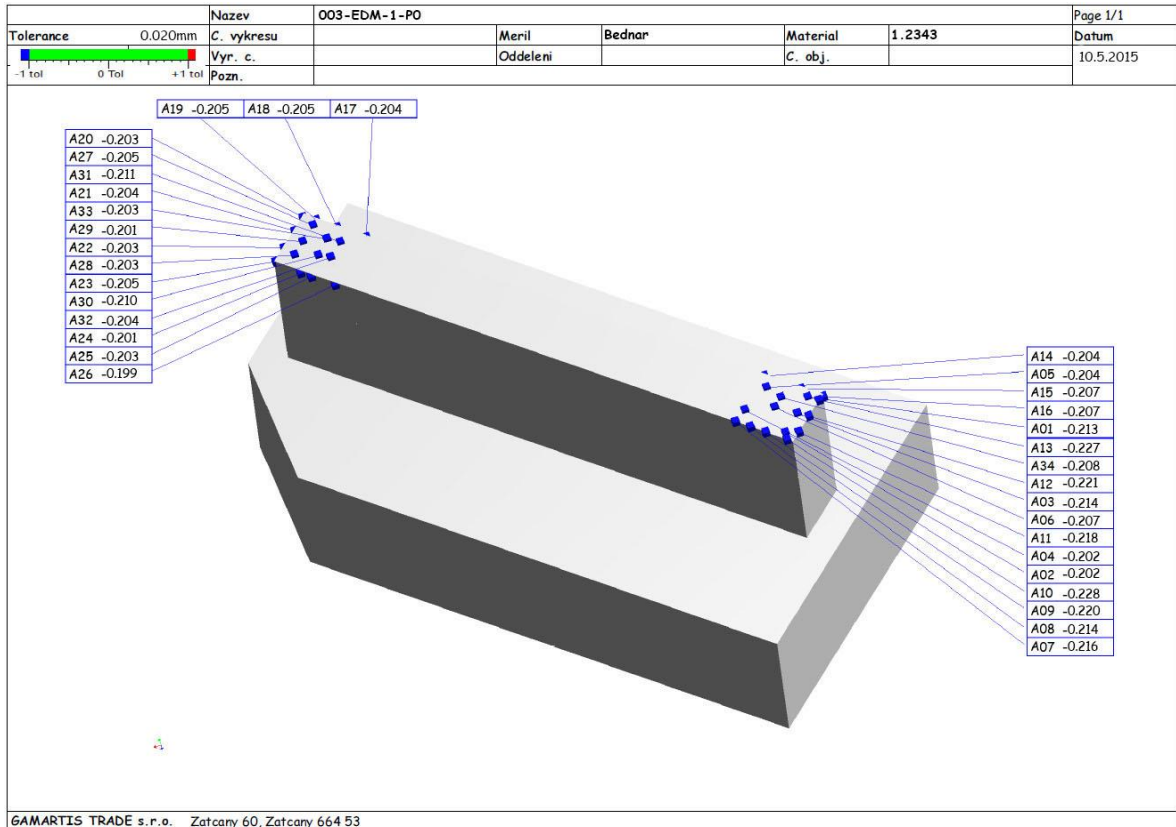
EDM-1 rib shaped tool electrode measurement protocol after the EDM.
